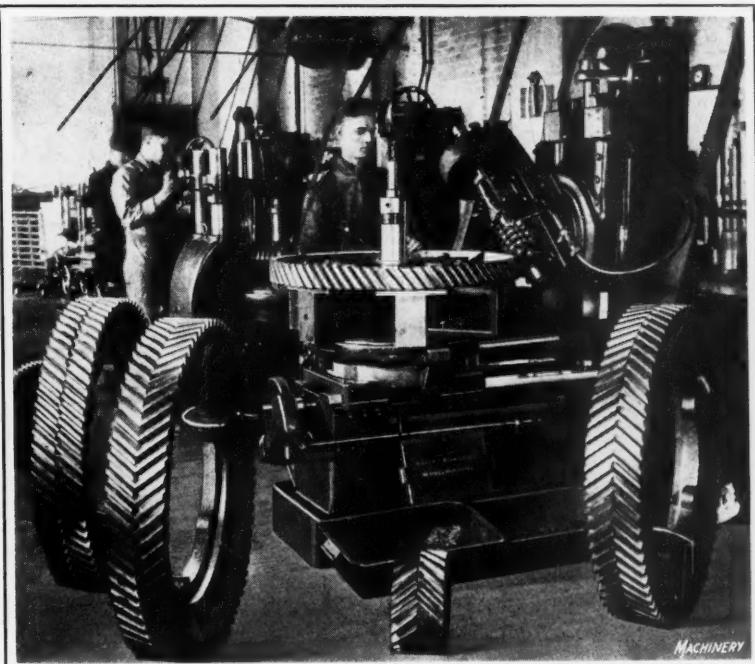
Cutting Herringbone Gears formed of Two Sections
